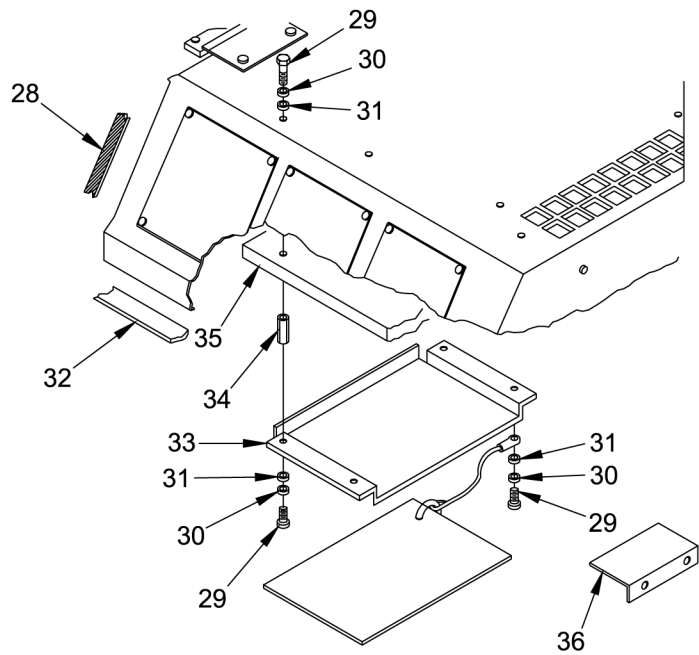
Frame and Housing Assembly/Main Access Cover (Sheet 4 of 4).
